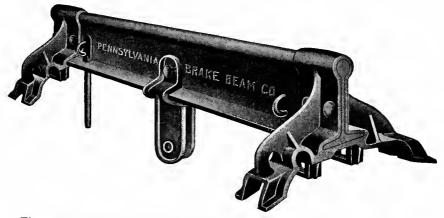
Standard Deck Beam Brake Beam with Drop Forged Fulcrum.
